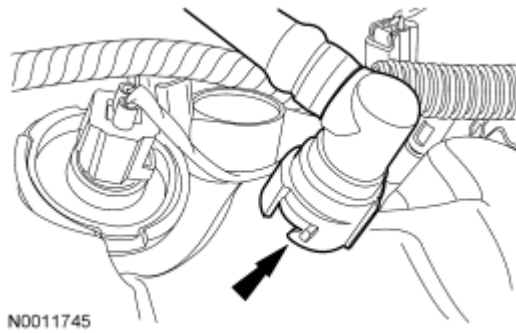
Locating Positive Crankcase Ventilation Tubes
